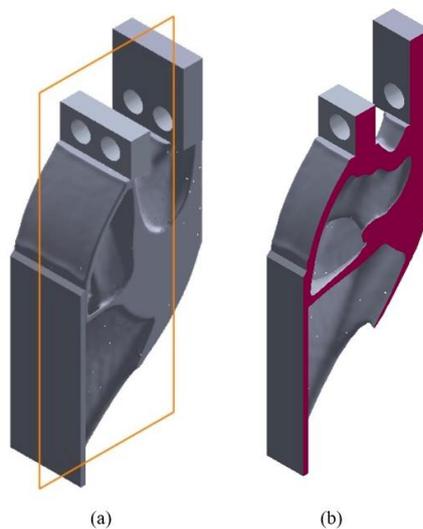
CAD Isometric view of the finger (a) and a cutaway view (b).
